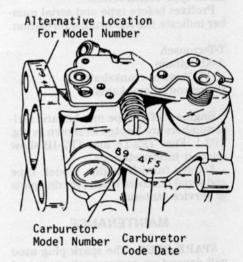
View showing location of carburetor lentification number on Tecumseh diaphragm type carburetor.
